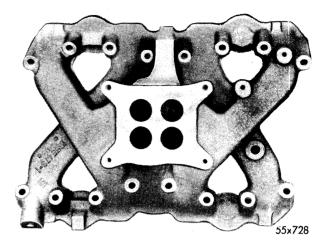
Intake Manifold (Double Rocker Shaft Engine)
